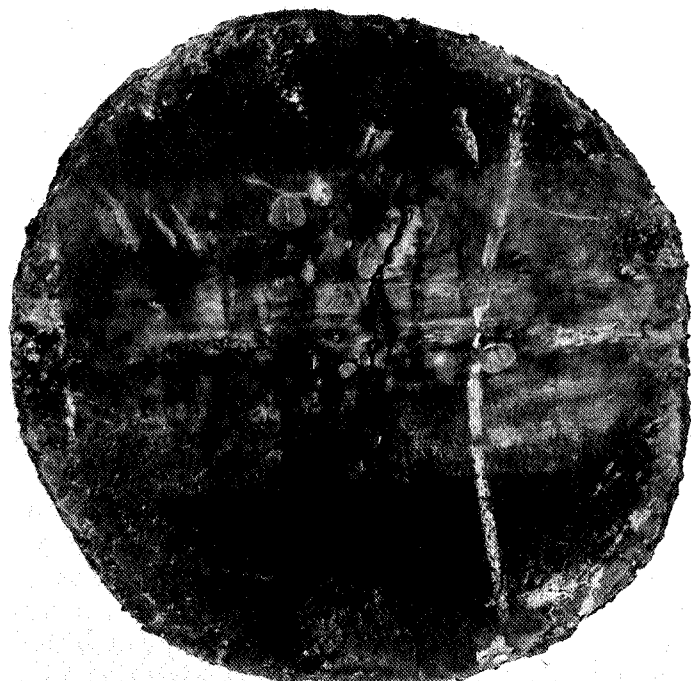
Inside surface of the 7-in. sample, as received by the test laboratory.
